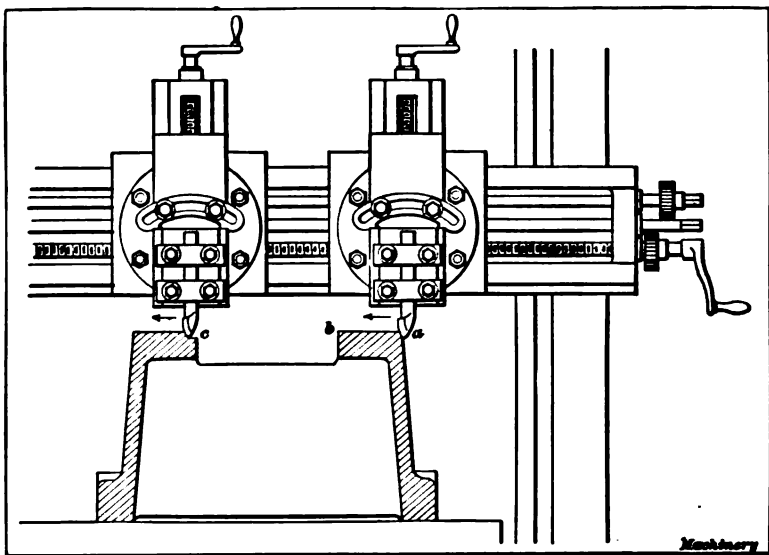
Planing Two Surfaces Simultaneously with Two-head Planer
